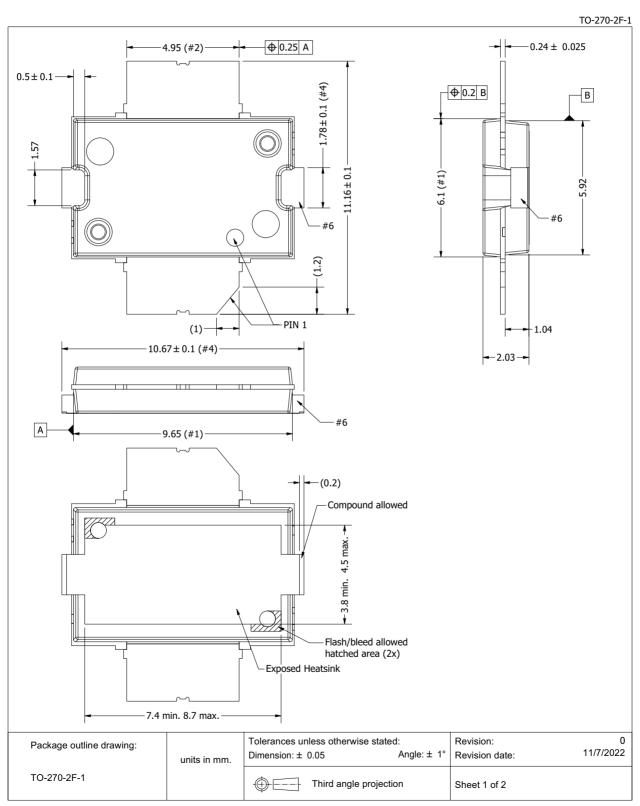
Package outline TO-270-2F-1 (sheet 1 of 2)
